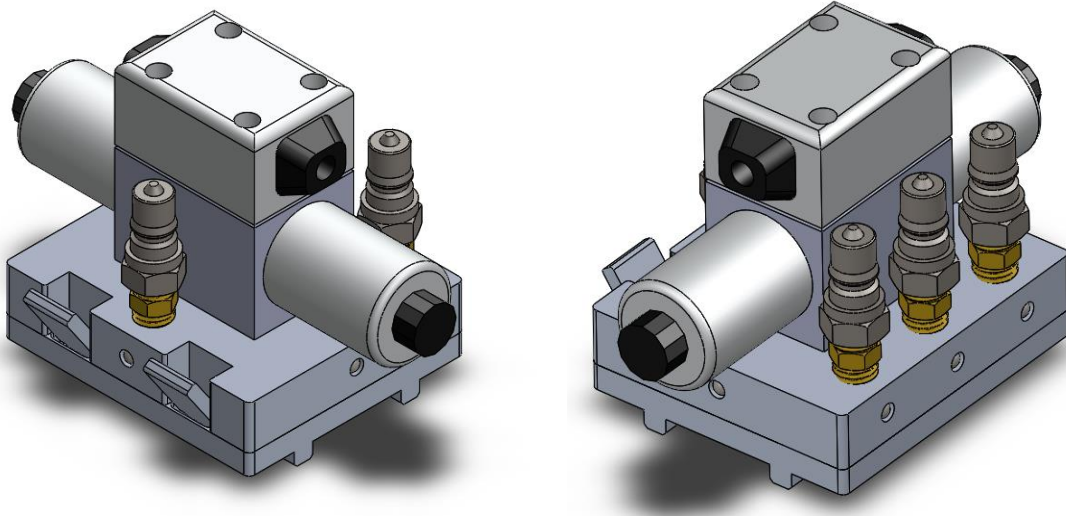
Shows a solenoid directional valve placed on the sub- and mounting plate assembly.
